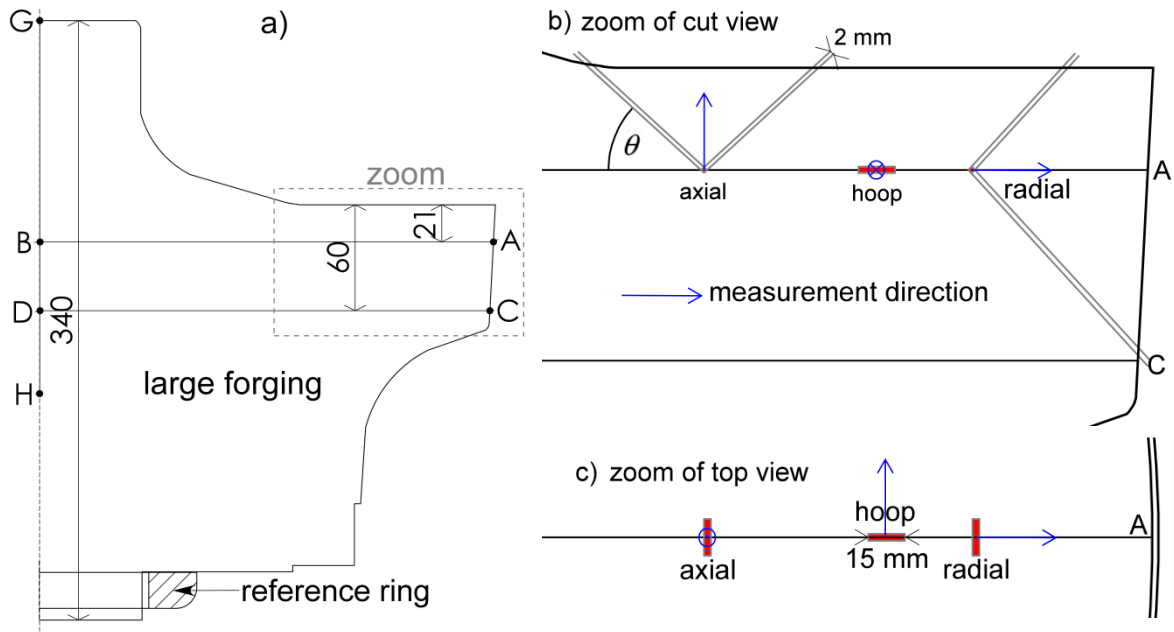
Large forging (a) magnified to illustrate the 2 mm x 2 mm x 15 mm NGV used at SALSA in cut view (b) and in top view (c). Dimensions in mm.
